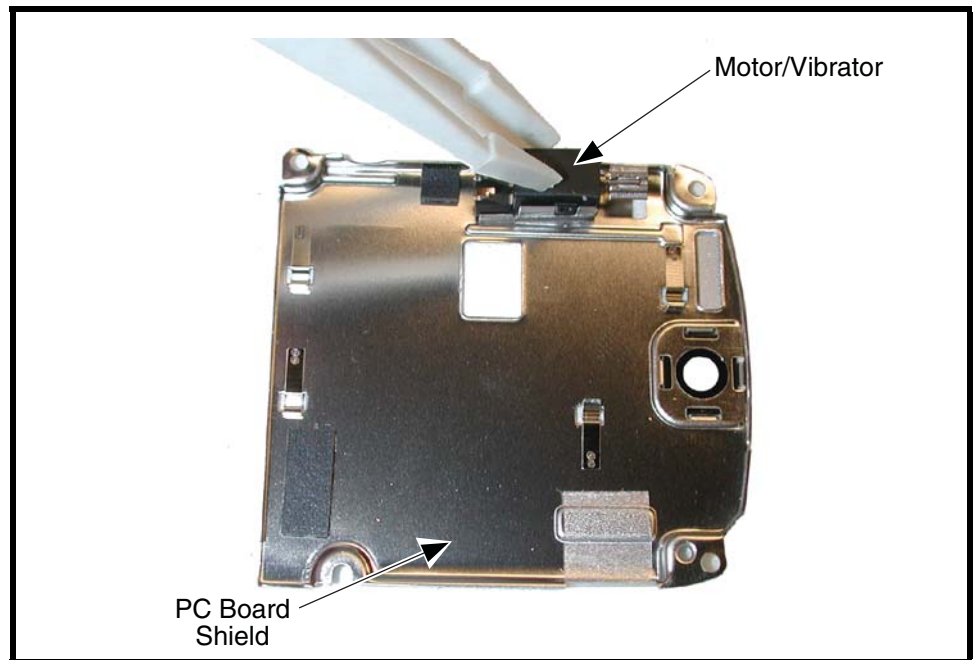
Removing and Replacing the Transceiver PC Board Shield
